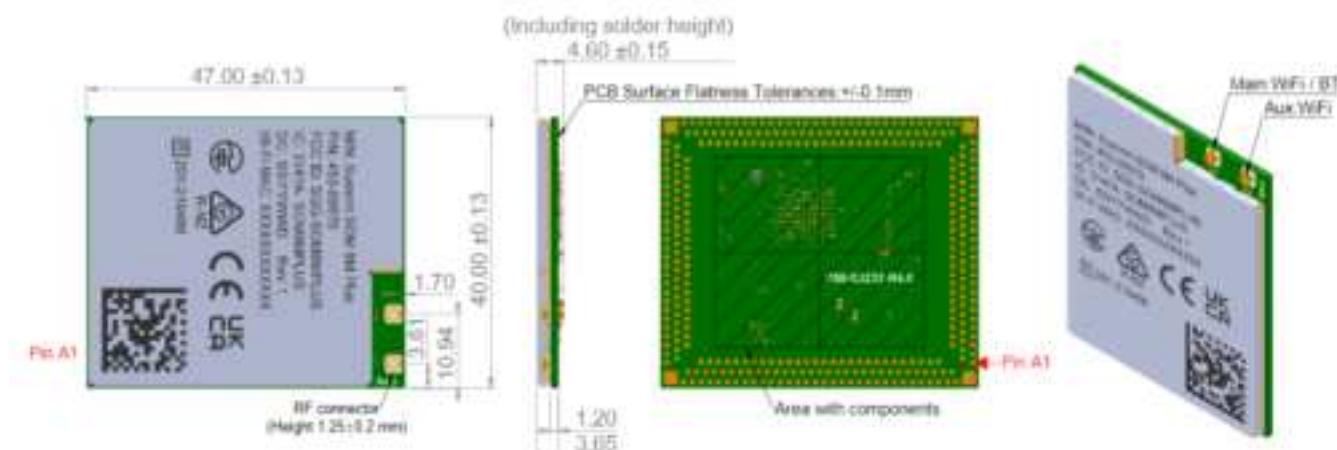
Mechanical drawing – Summit SOM 8M Plus module
